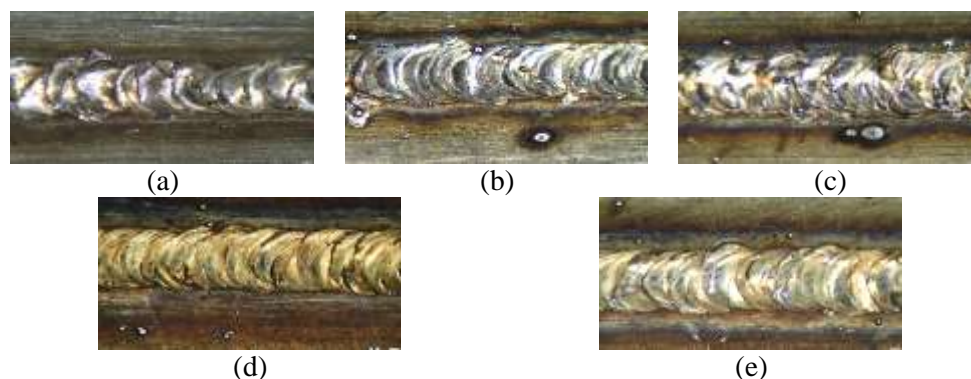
Top views of welded joints at welding speed. (a) 1.3 mm/s (b) 1.5 mm/s (c) 1.7 mm/s (d) 1.9 mm/s (e) 2.1 mm/s
